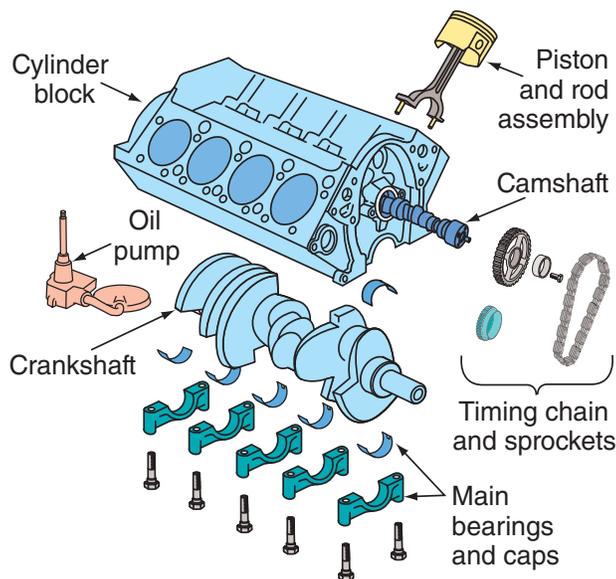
Exploded view of a short block for a cam-in-block engine.
